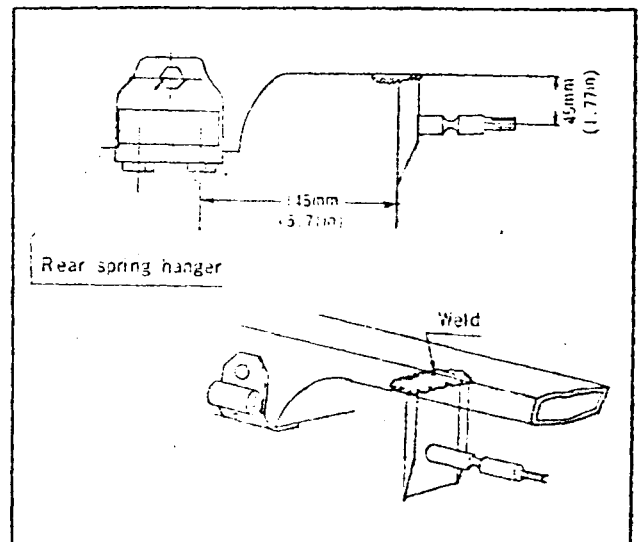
Drawing for Attaching Exhaust Pipe Bracket
